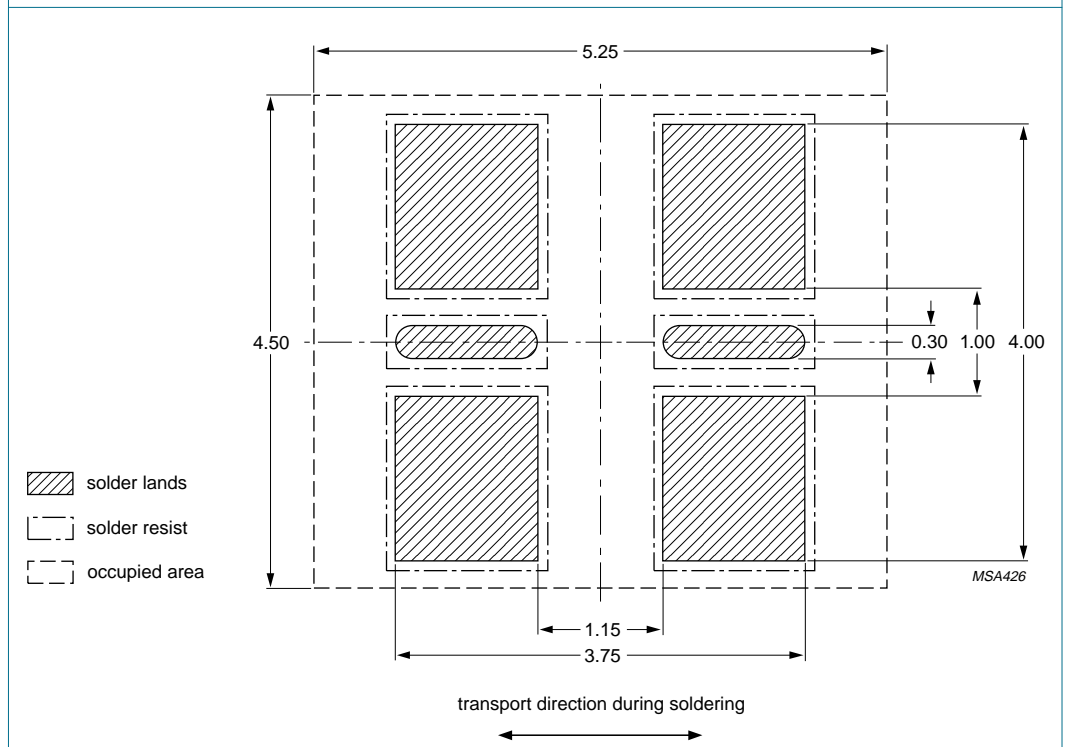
Wave soldering footprint SOT323 (SC-70)
